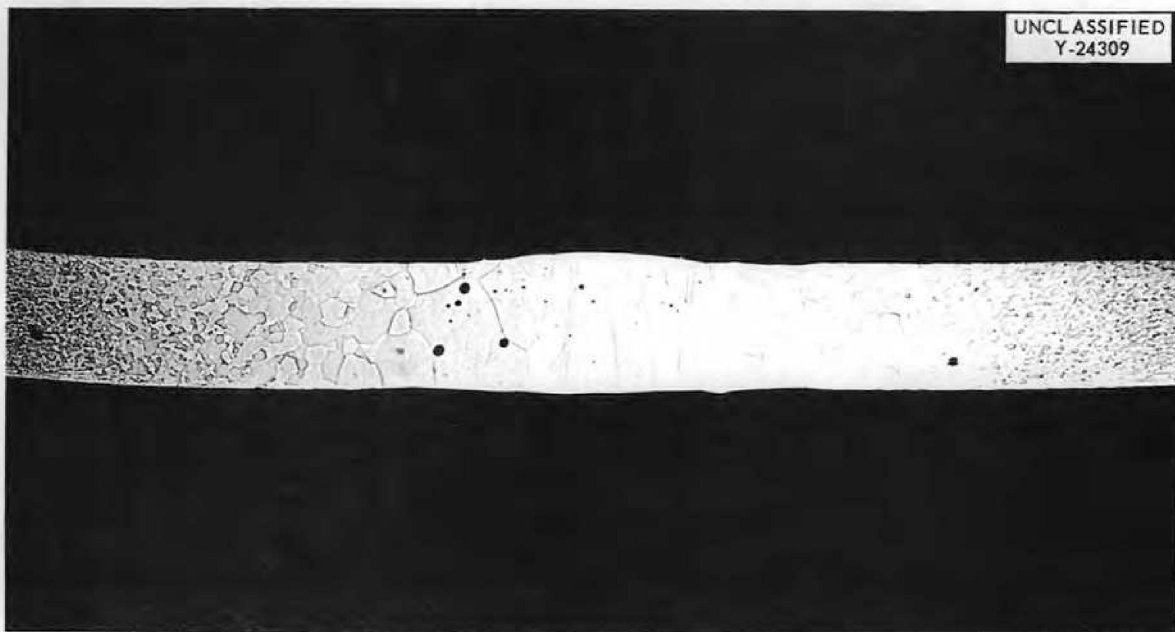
Fusion Seam Weld Machine-Made in Niobium Tubing at ORNL. 22X.
